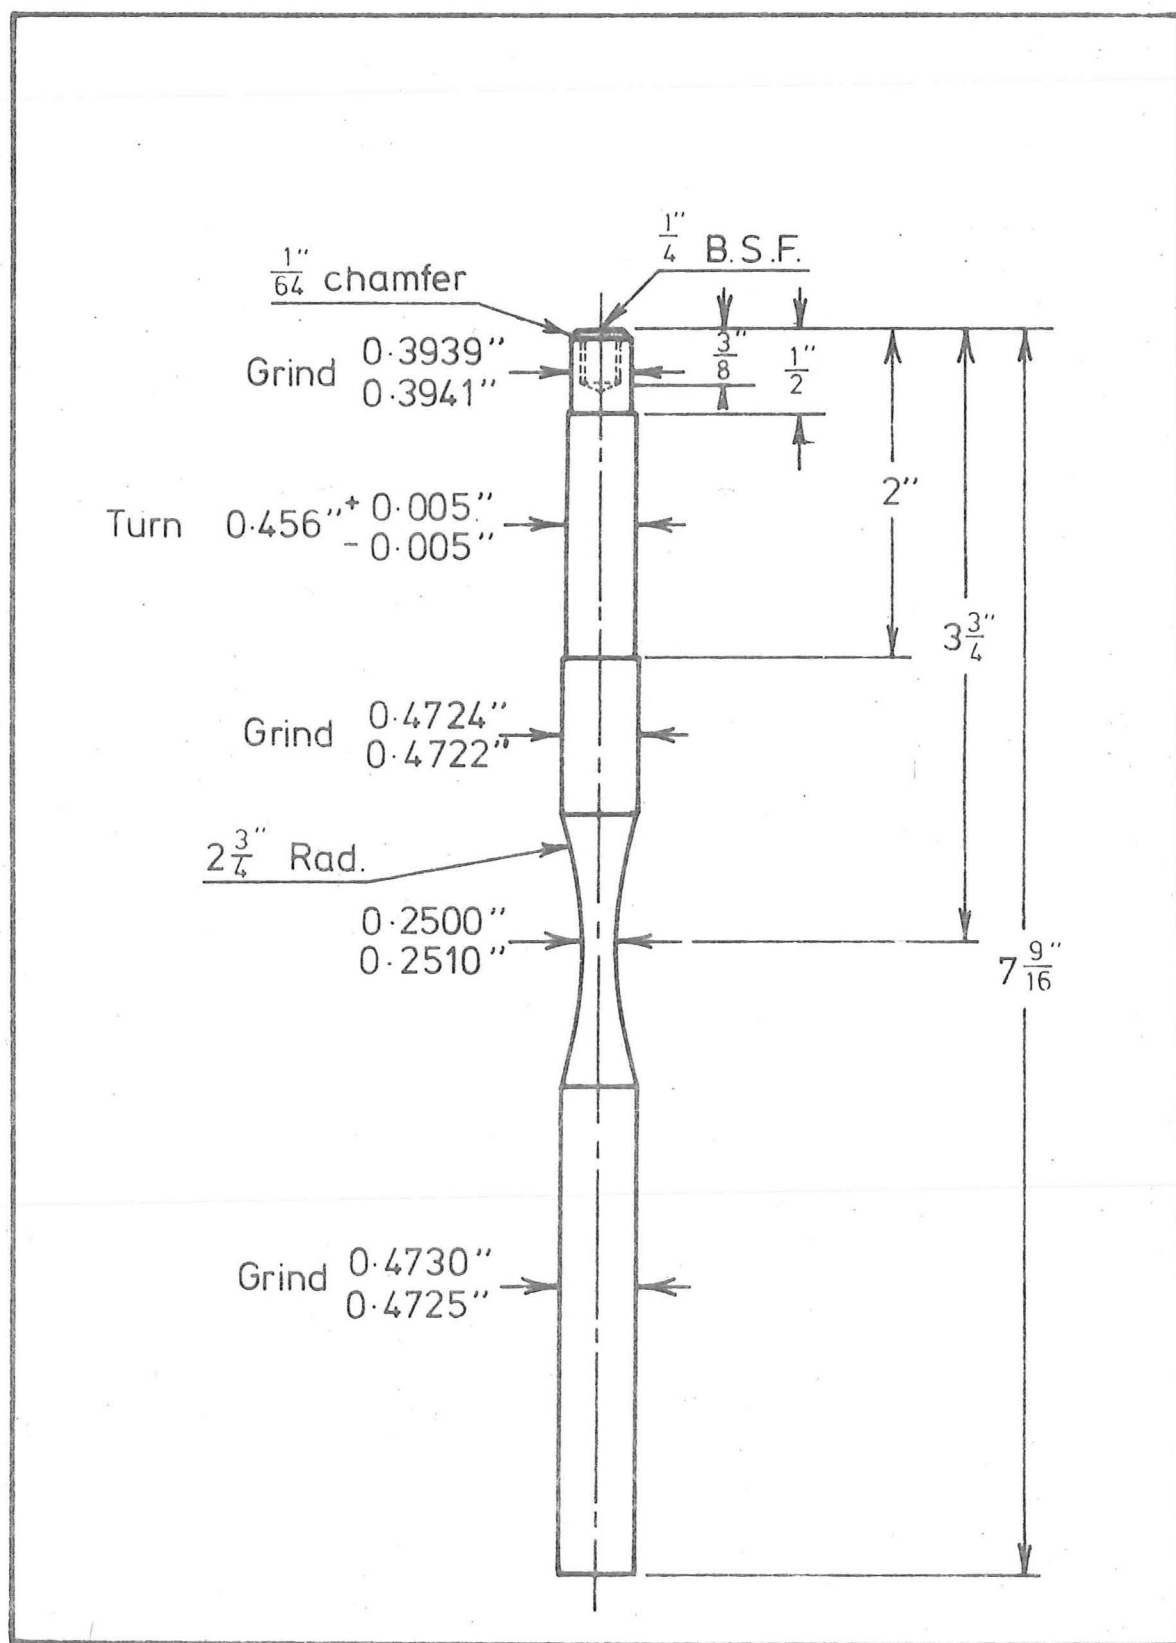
ROTATING BENDING FATIGUE SPECIMEN
